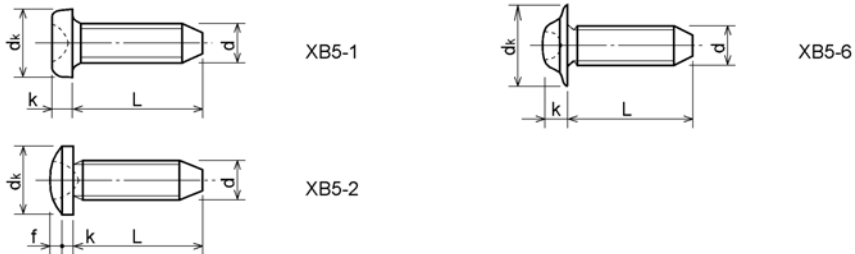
/7) MECHANICAL STANDARD PARTS (SCREWS)
